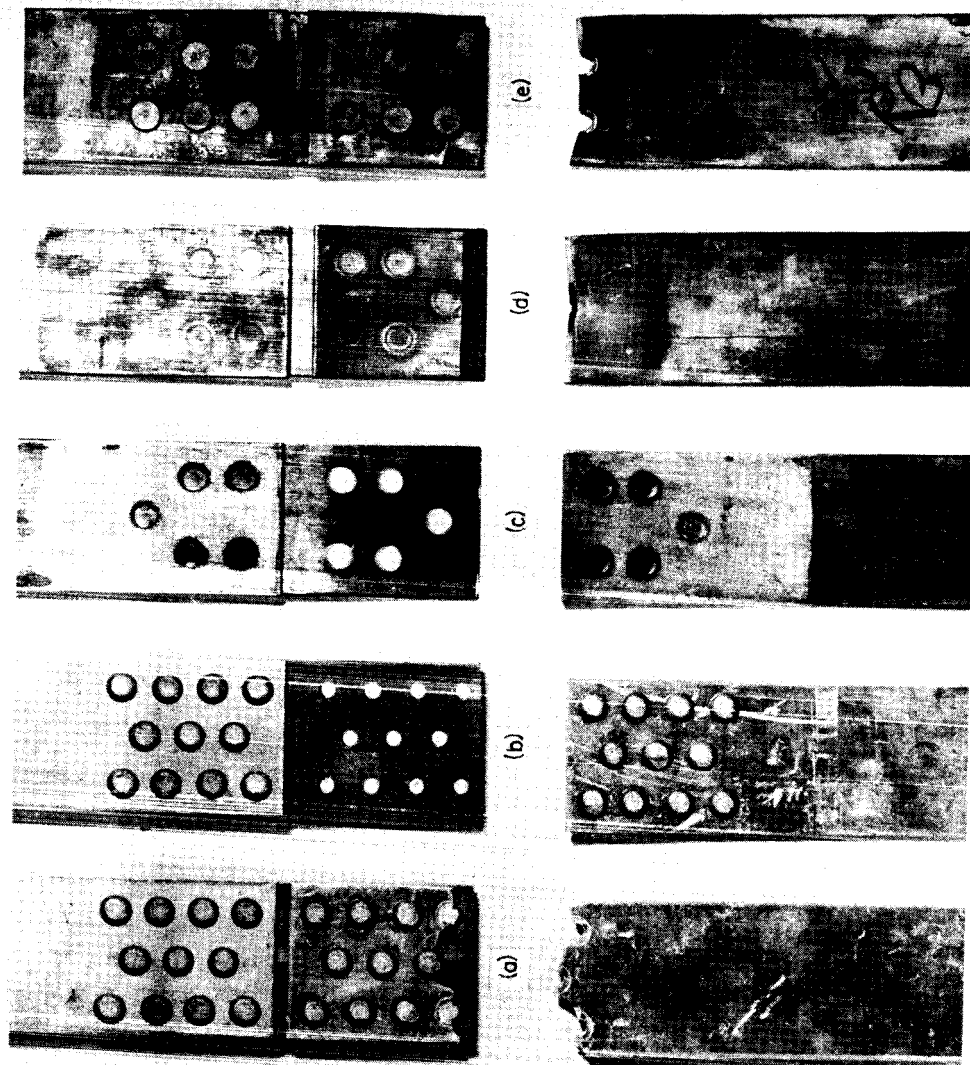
Typical failures of joint specimens. Left to right: (a) tensile failure of group D joint; (b) shear failure of group D joint; (c) shear failure of group Q joint; (d) tensile failure of group Q joint; (e) tensile failure of group R joint.
